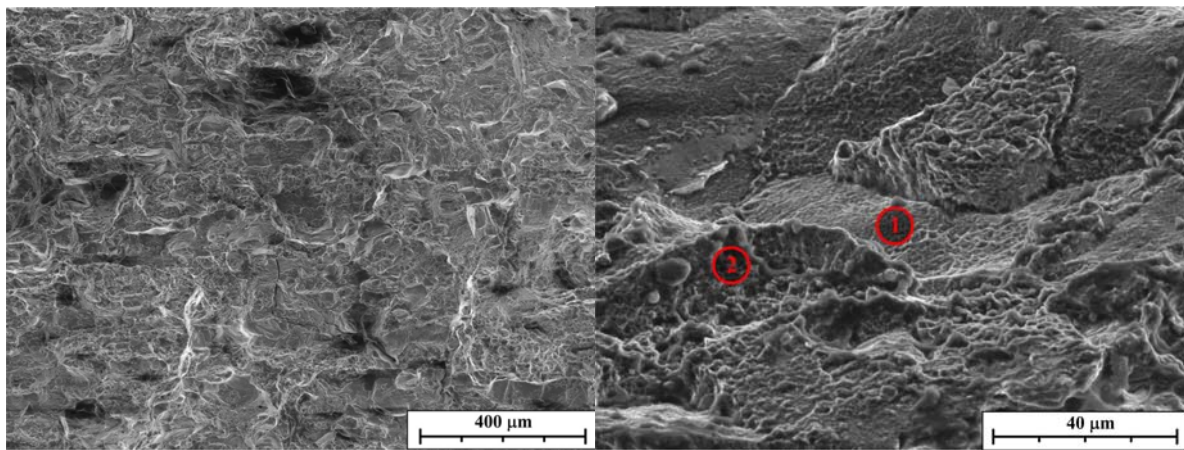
Fracture surface (45° inclined w. r. t. the SL-plane) with L as the main loading direction. The numbers correspond to intergranular ductile fracture (1) and transgranular ductile fracture (2) regions.
